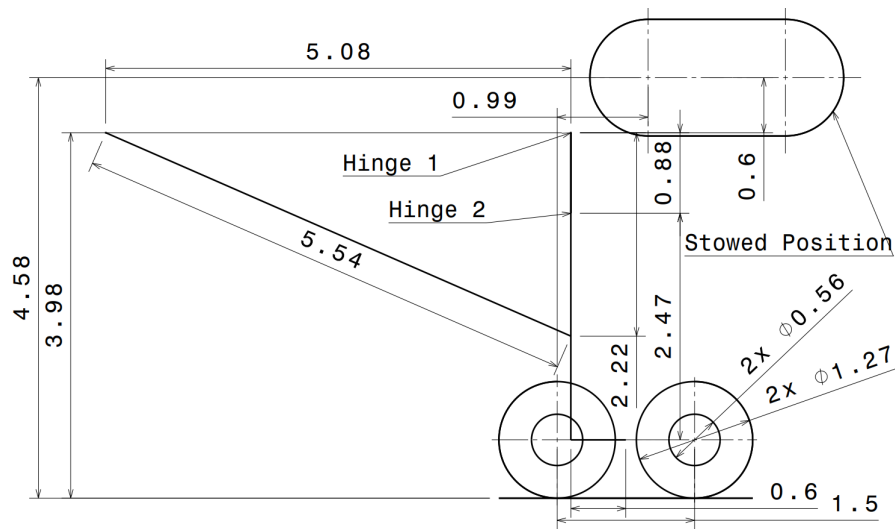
Main gear mechanism dimensions in deployed position, all dimensions are in metres
